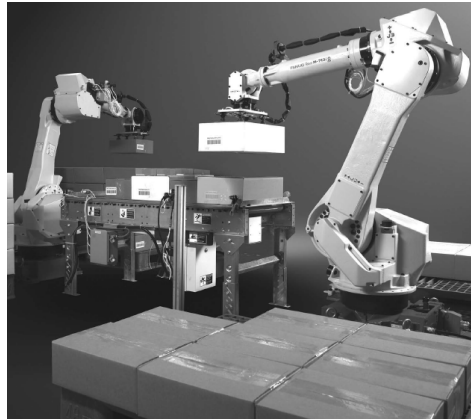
Example of assembly of parts aided by robotic manipulators [52].
